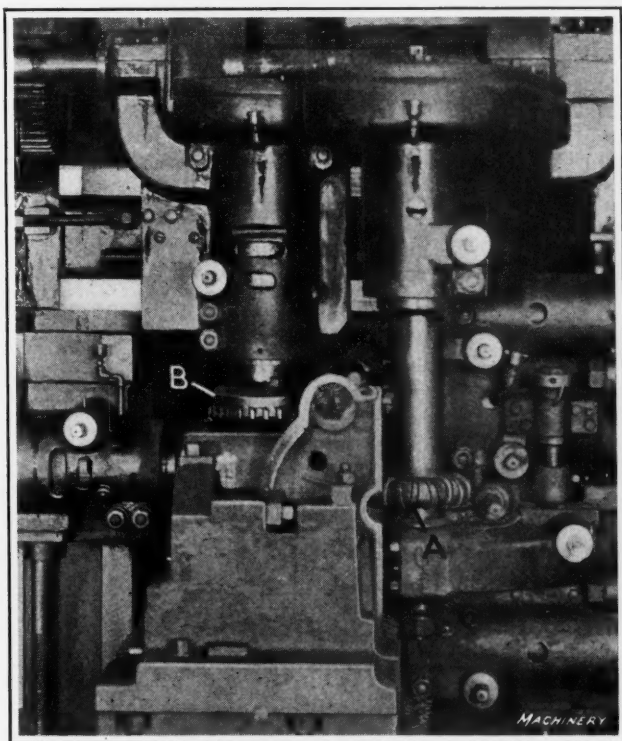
Multiple-spindle Milling Machine provided with Cutter A for milling Crankshaft Bearings in Crankcases, and Cutter B that recedes to clear the Timing Gear Case; the Usual Arrangement of Facing Heads is also provided
